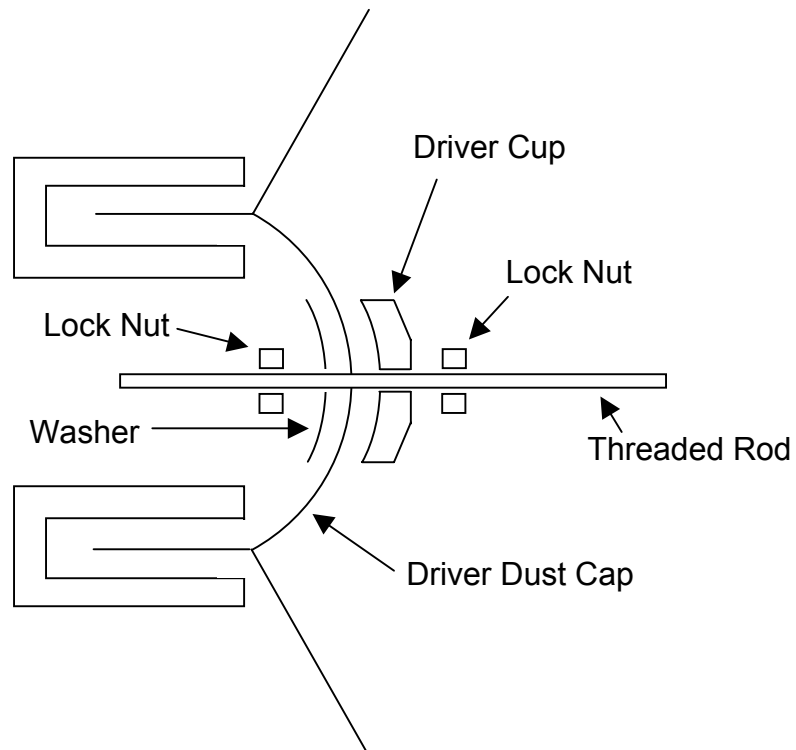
Sketch of mechanical bonding of loudspeaker and driver cup. This system can be used on vented loudspeakers only.
